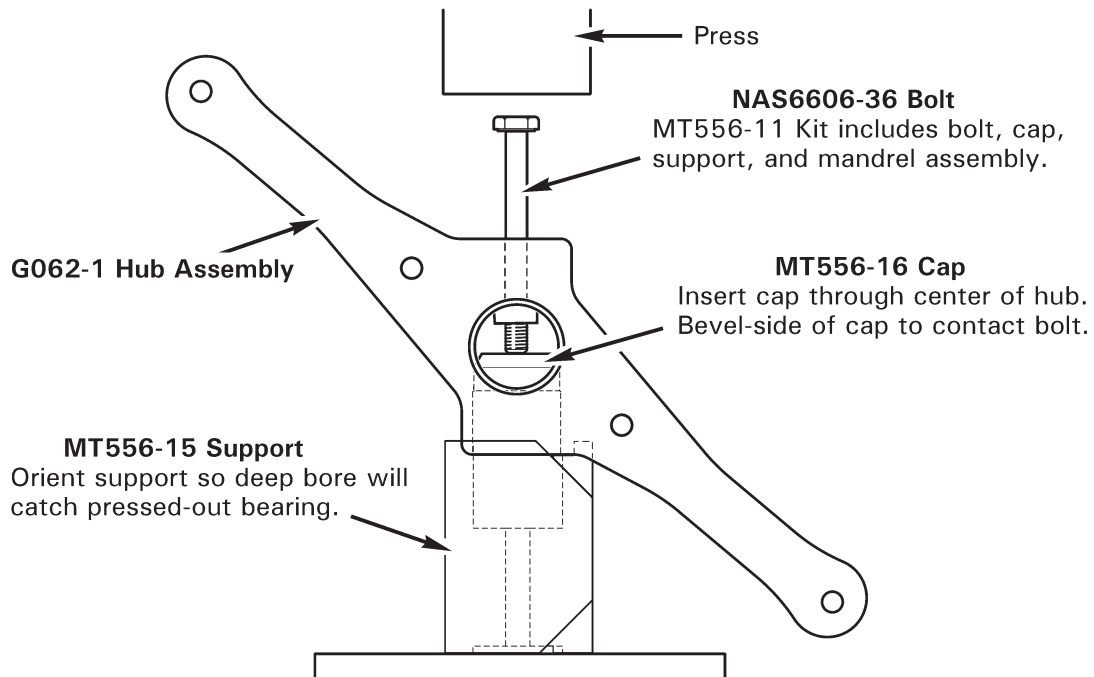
ELASTOMERIC BEARING REMOVAL
